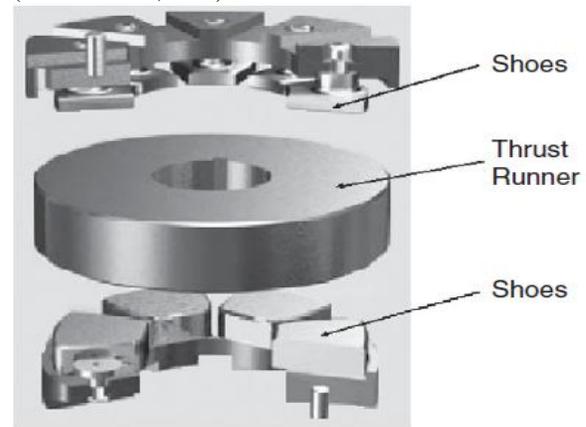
Submersible pump thrust bearing (Gabor, 2009)
